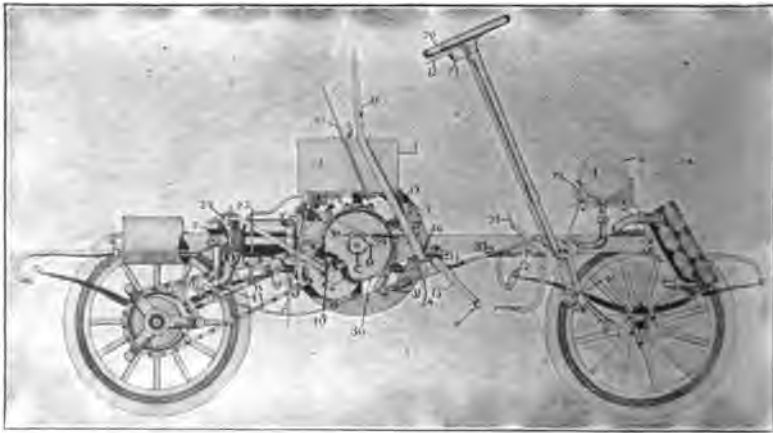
Sectional Elevation of the Cadillac Chassis, showing operative and control apparatus, as explained in text.
